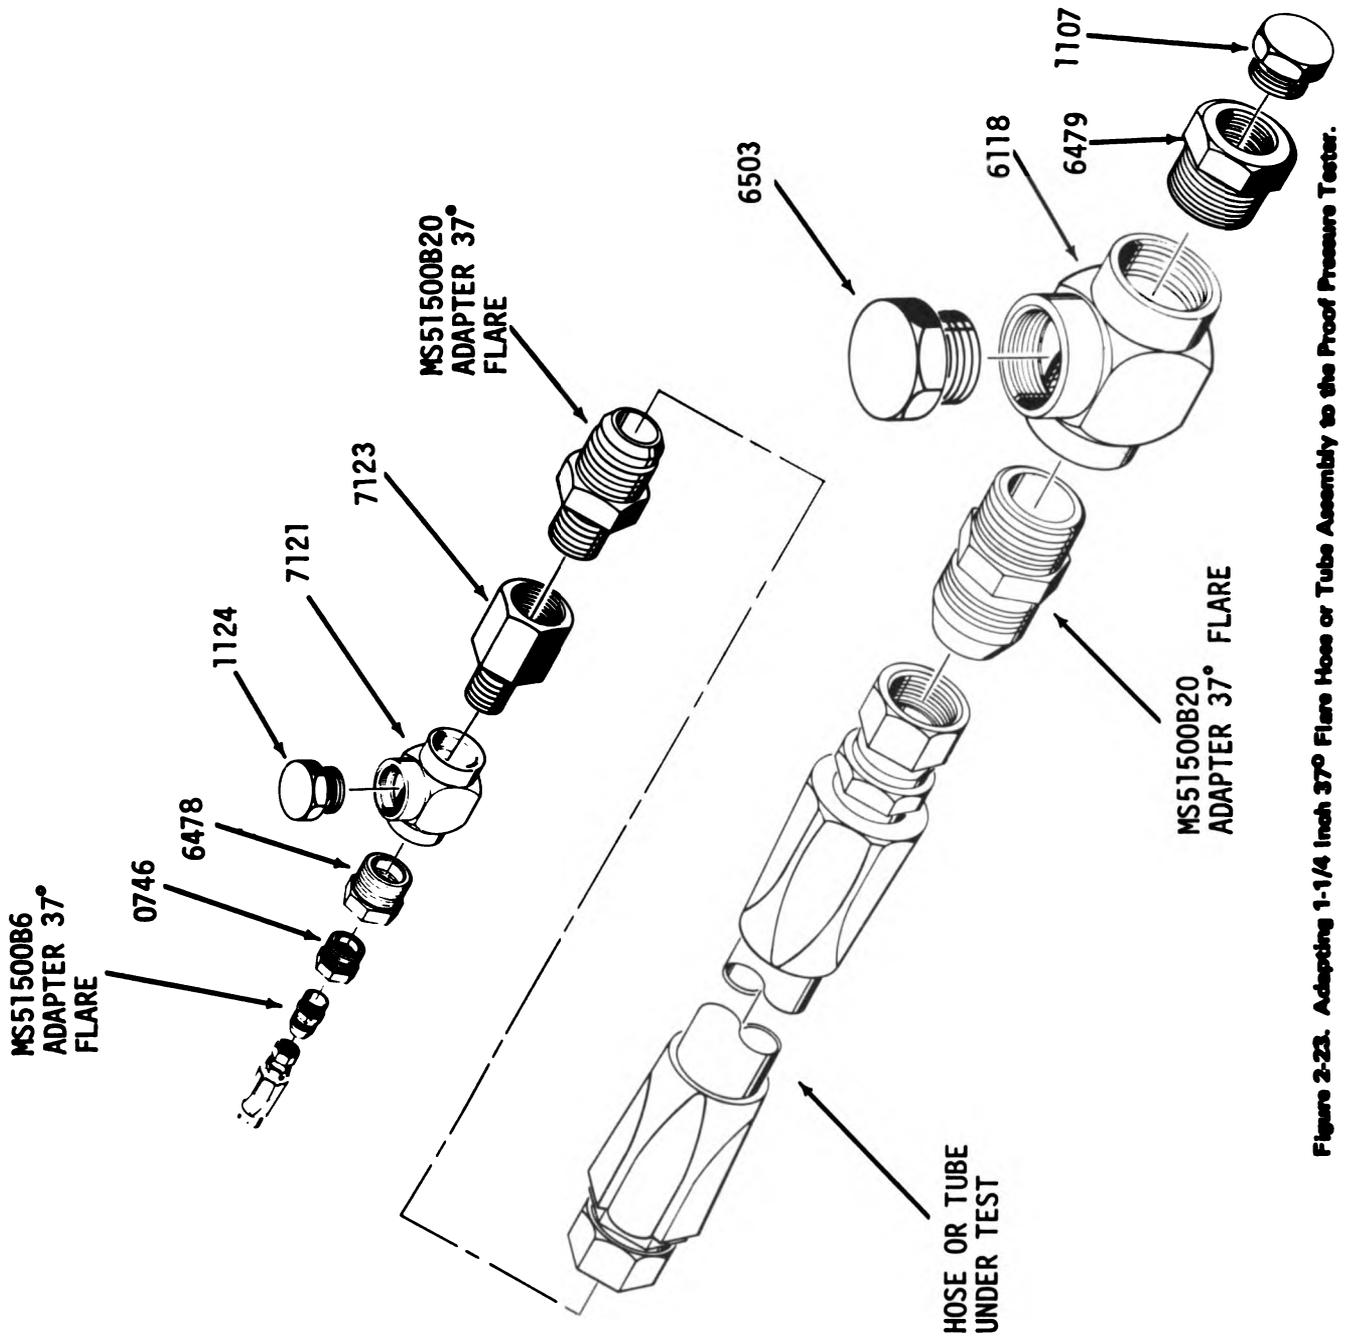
Adapting 1-1/4 Inch 37° Flare Hose or Tube Assembly to the Proof Pressure Tester.
